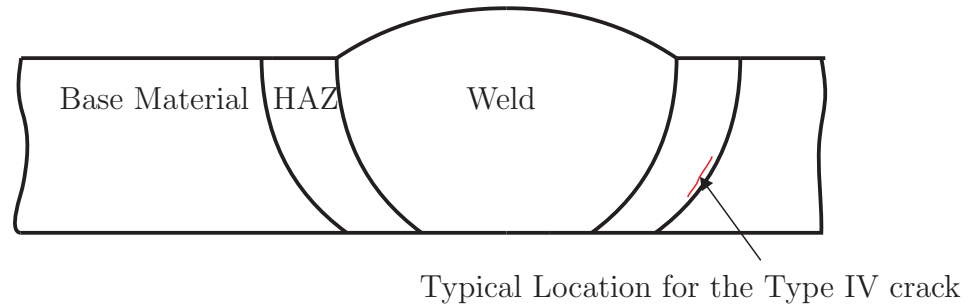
Weld Showing the Three Different Zones and Type IV Damage.
